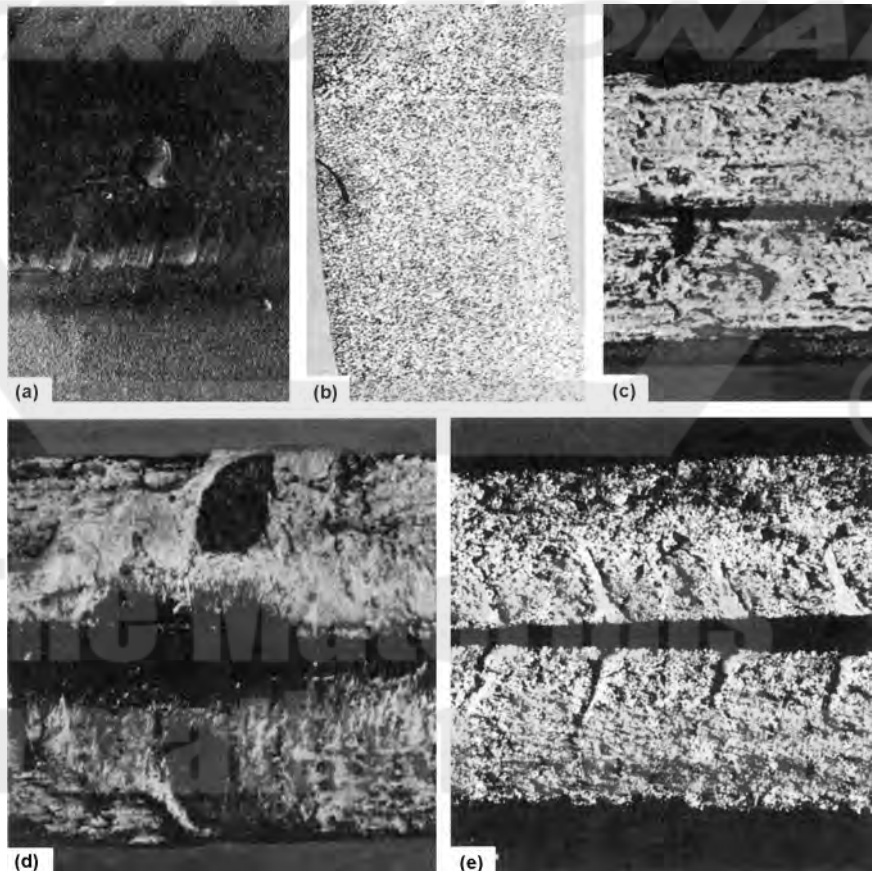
Typical flaws in resistance welded steel tubing, (a) contact marks (electrode burns), (b) hook cracks (upturned fiber flaws), (c) weld area crack, (d) pinhole, (e) stitching. Views (c), (d), and (e) are mating fracture surfaces of welds. Source: Ref 1
